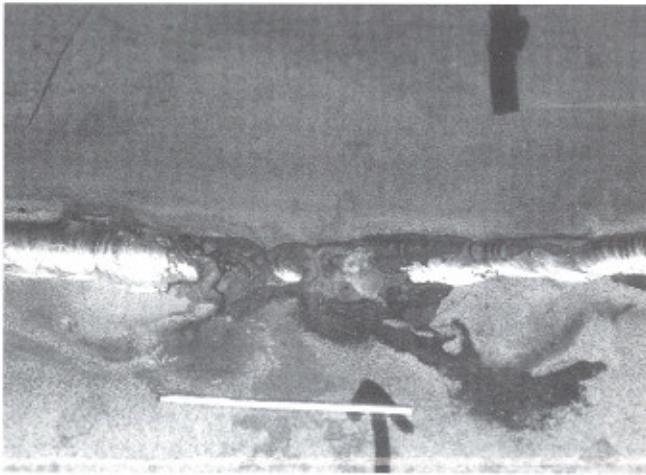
Weld corrosion of stainless steel weld caused by lack of proper cleaning and preparation resulting in rusting of surface oxides
